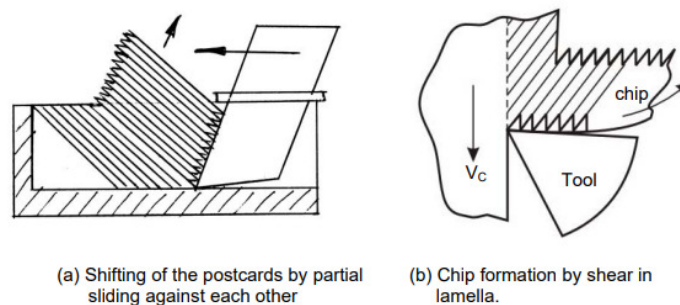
Piispanen model of card analogy to explain chip formation in machining ductile materials
